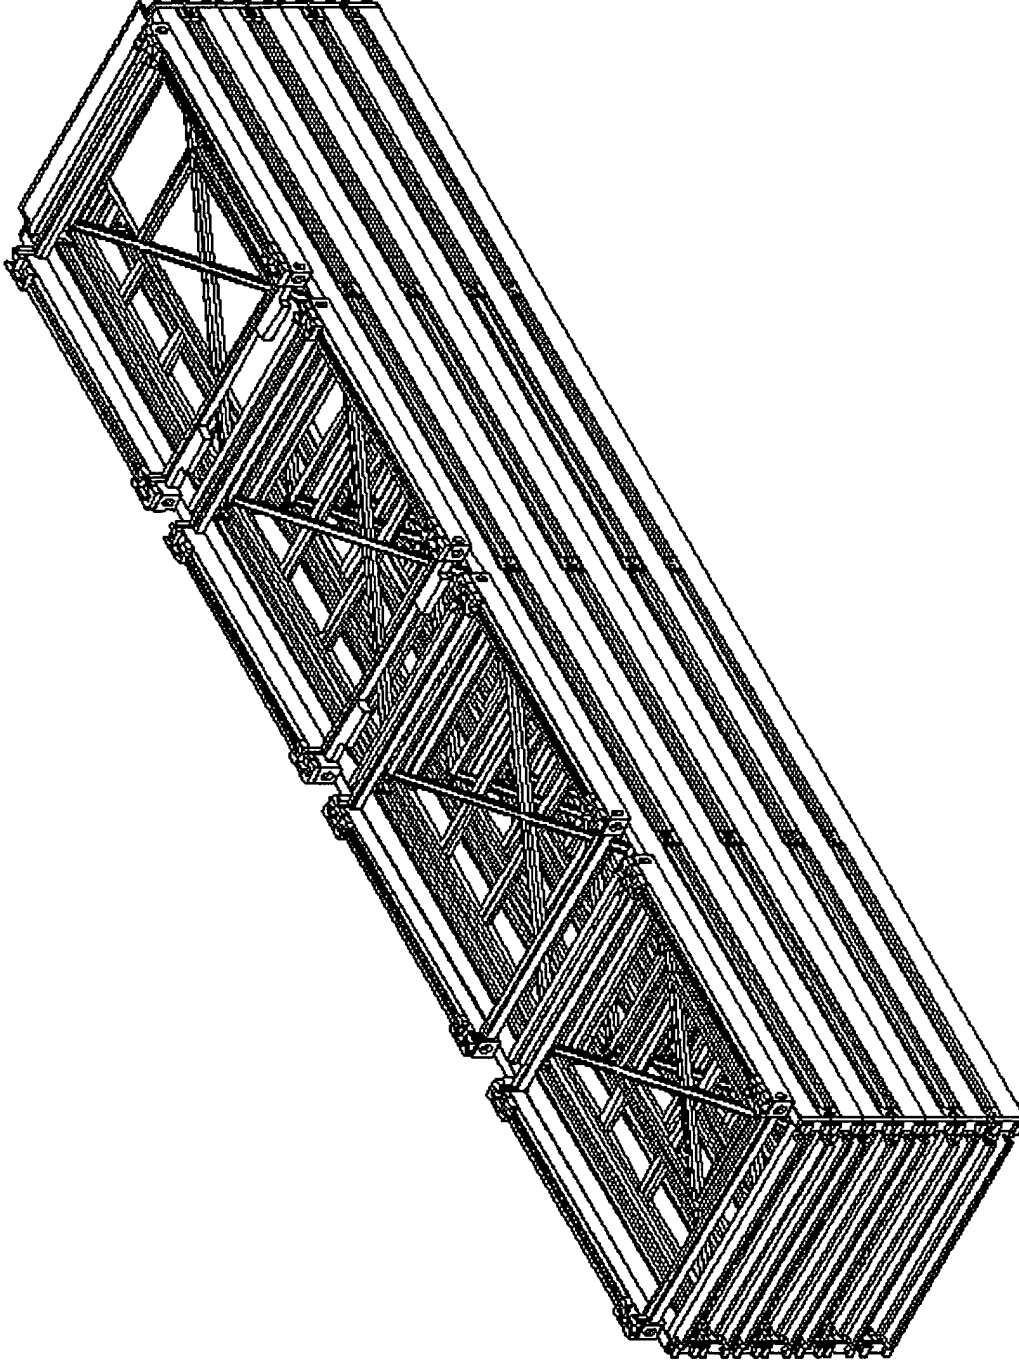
A: Step5 of disassemble and load process: The left and right frames from 2 disassembled cargo containers are stacked on top of the previous assembly.
